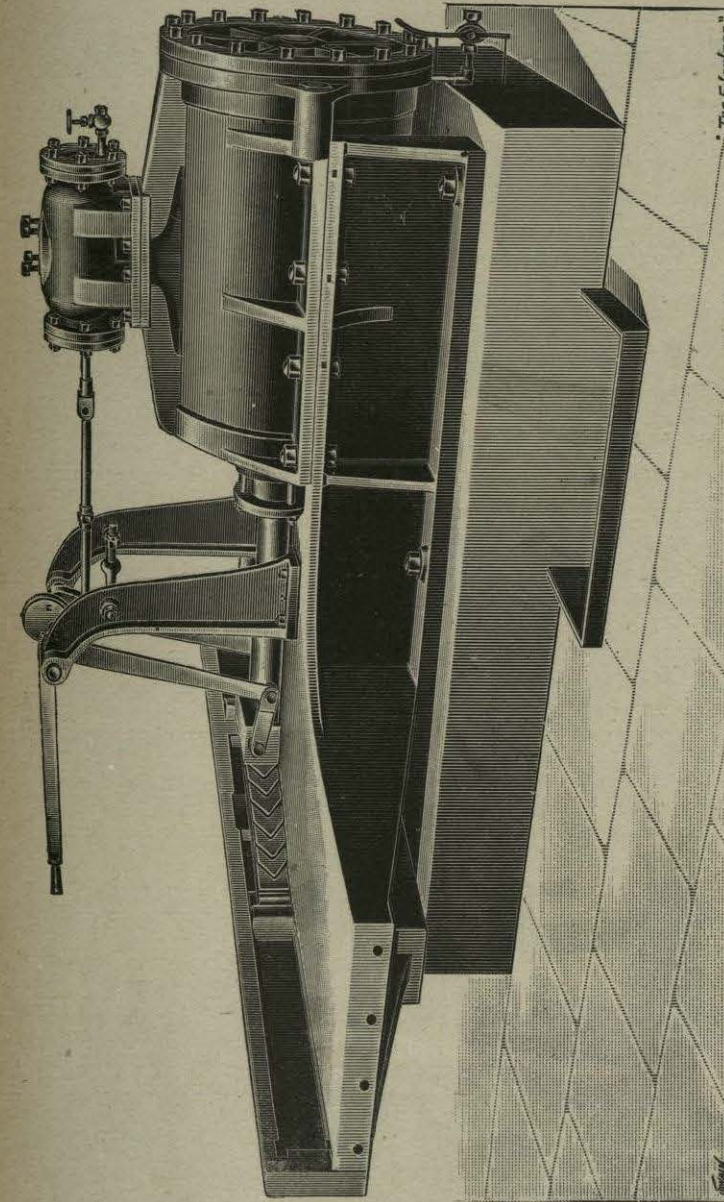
Spring Scragging Machine. From the Engineer, Aug. 5, 1898.
